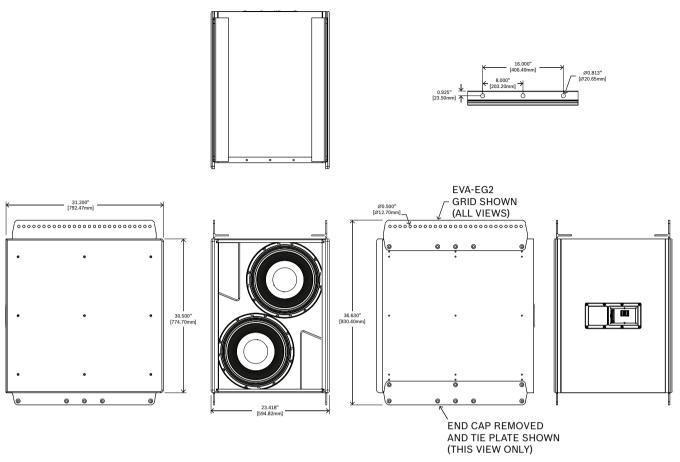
EVA-2151D dimensional views and spreader bar attach holes
